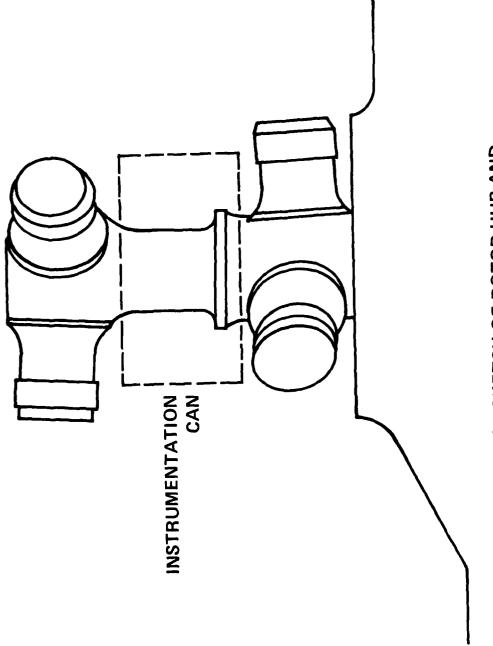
SKETCH OF ROTOR HUB AND INSTRUMENTATION CAN
